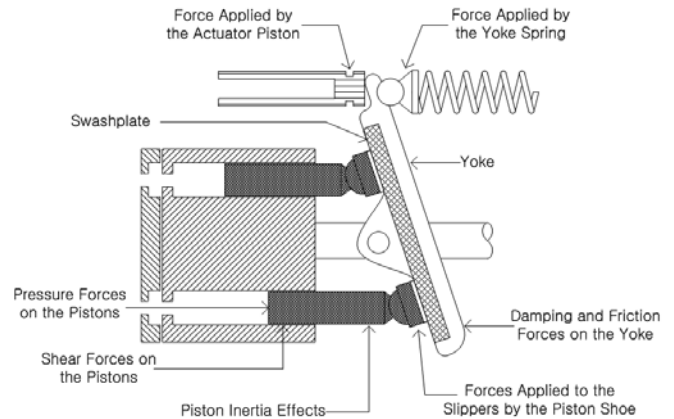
Components of the Swash plate-Yoke Assembly torques
